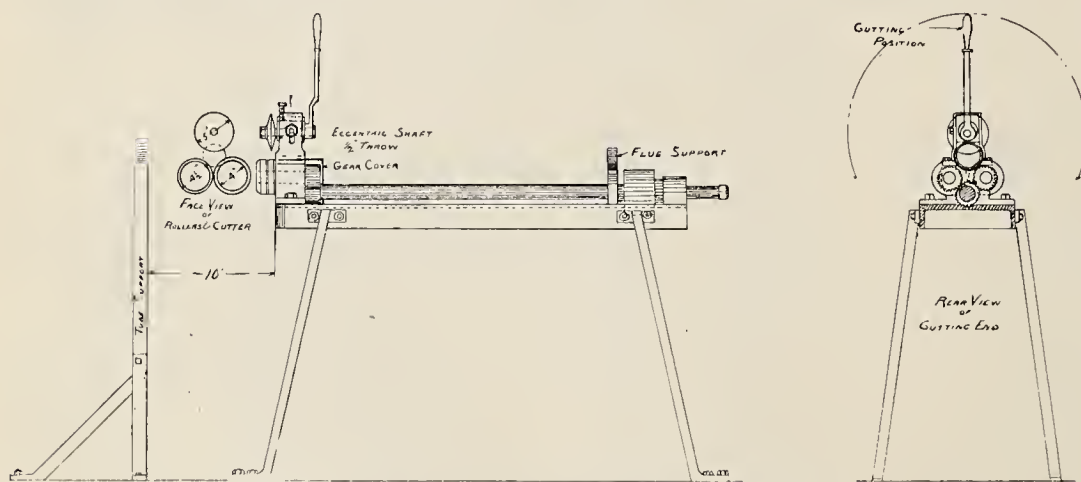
FLUE CUTTING MACHINE, M. & ST. L. R. R.
